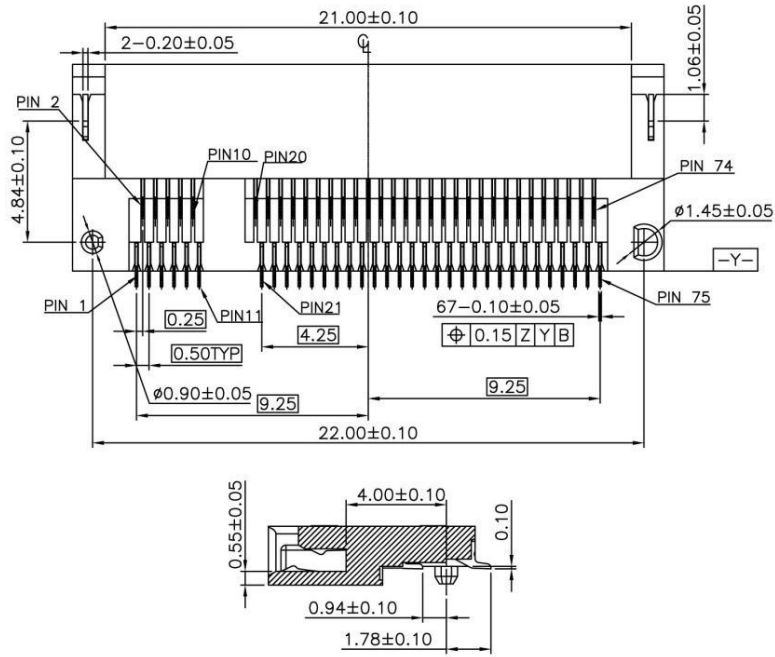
M.2 Dimensions of structure for stack-up Mid-mount single-sided module
